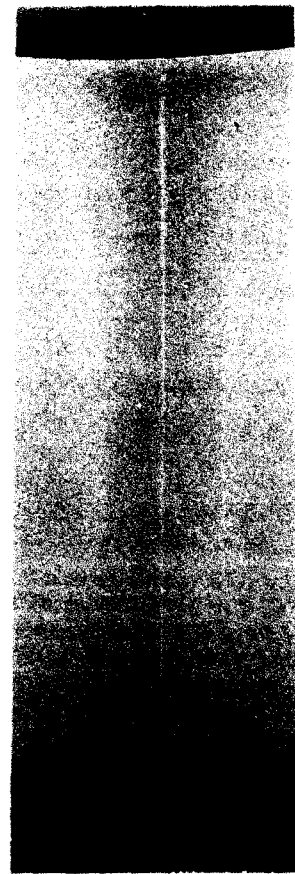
High-Frequency Welded Hydraulic Cylinder Tubing 11.25 in. Diameter, 0.65 in. Wall (As-Welded) (Magnification 6x)
